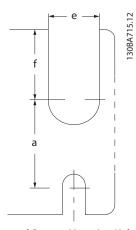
Top and Bottom Mounting Holes (B4, C3, and C4)
